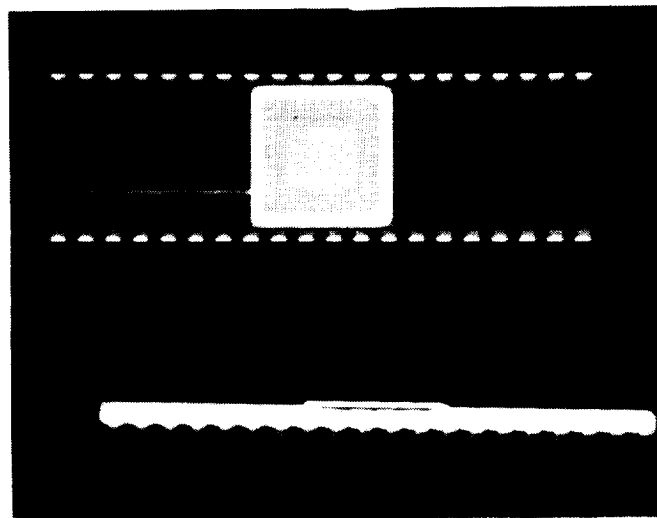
1.4X magnified top and side X-ray view of device No. 2 package lead frame and die cavity.
